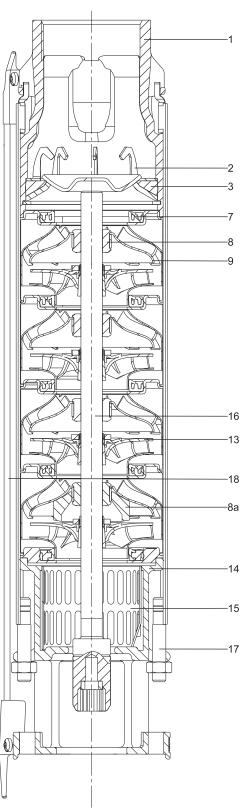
SP pump, 4" smooth shaft (SP 35S - 77S)
